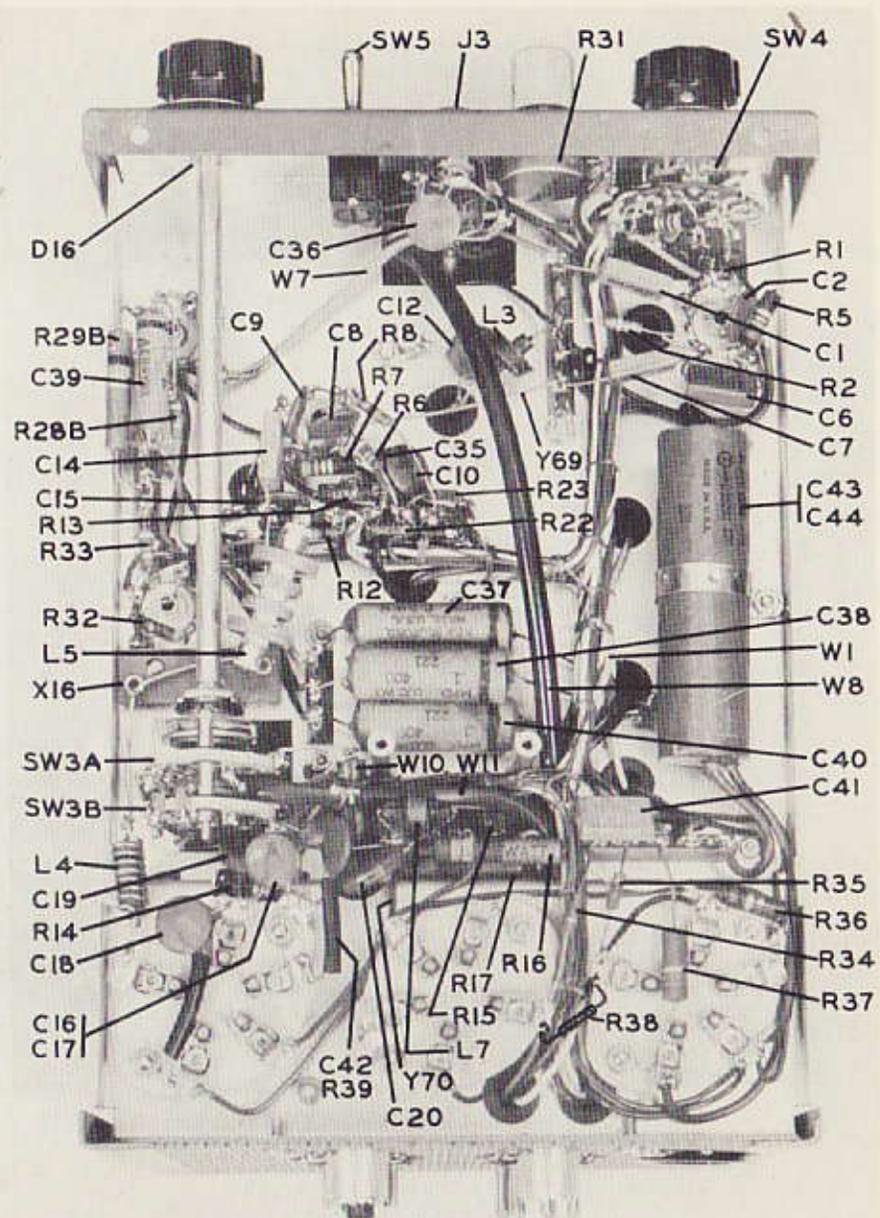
B BOTTOM CHASSIS - COMPLETE ASSEMBLY
